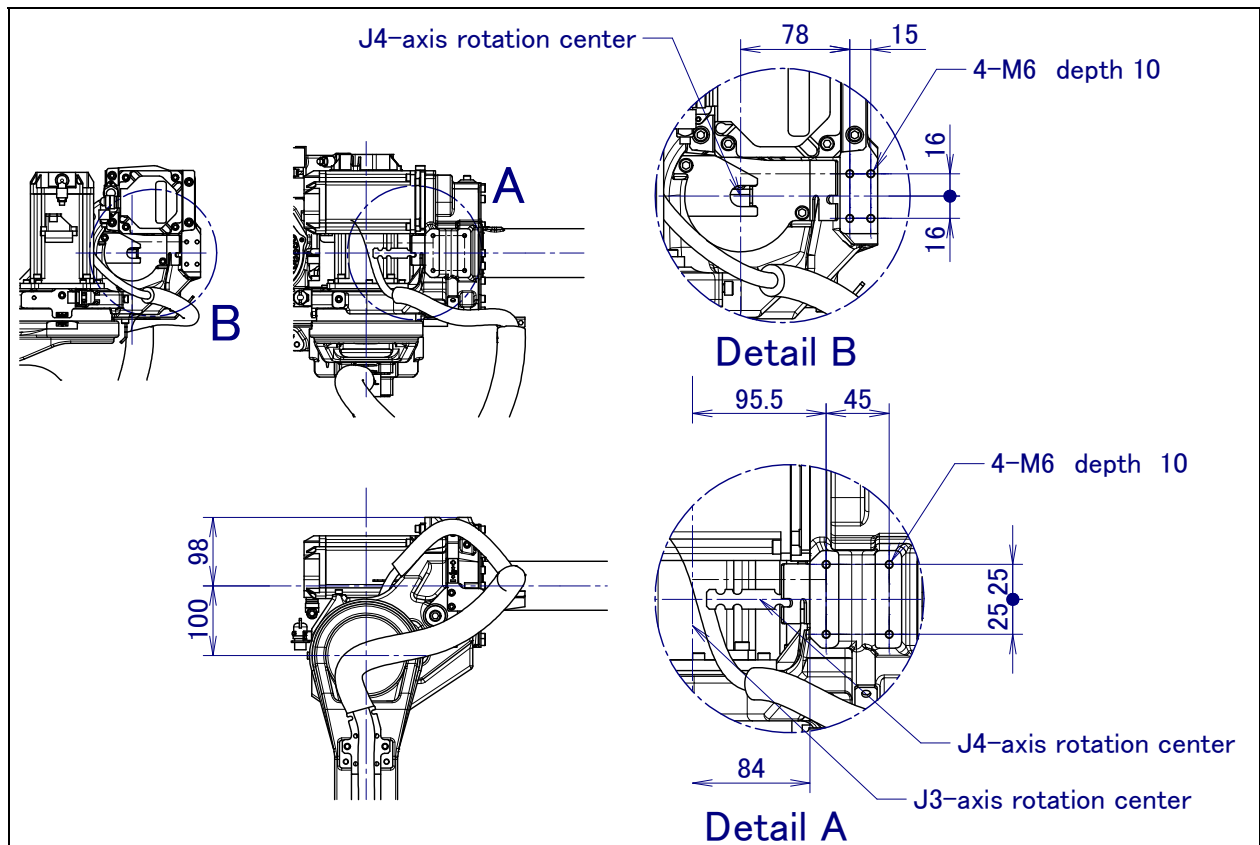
(a) Wire feeder mounting face diameter (J3 casing part)
